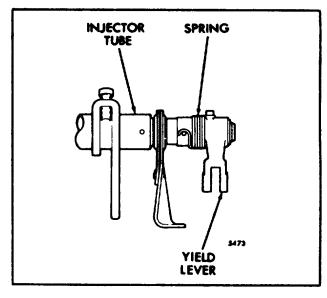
· Throttle Delay Yield Lever (In-Line Engine)
